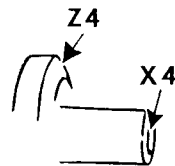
Position of Needle Bar Crank, During Removal of Shaft
